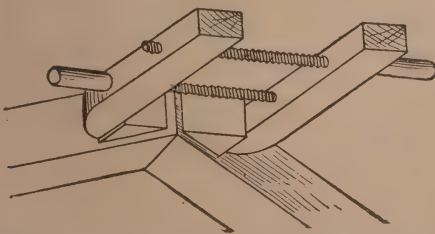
Cramping Mitre Joint by means of Double Hand-screw Cramp
